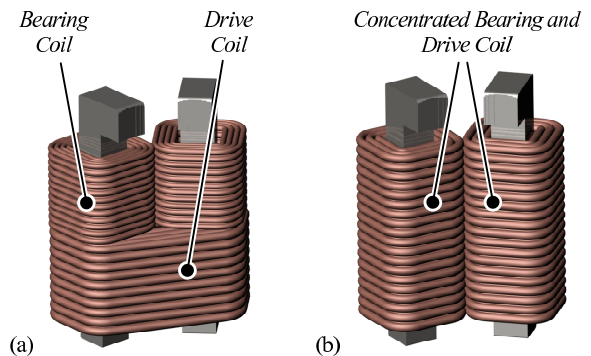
Winding concepts for the bearingless pump — separated coils (a) and concentrated coils (b) (detailed view on two of the eight stator claws)
